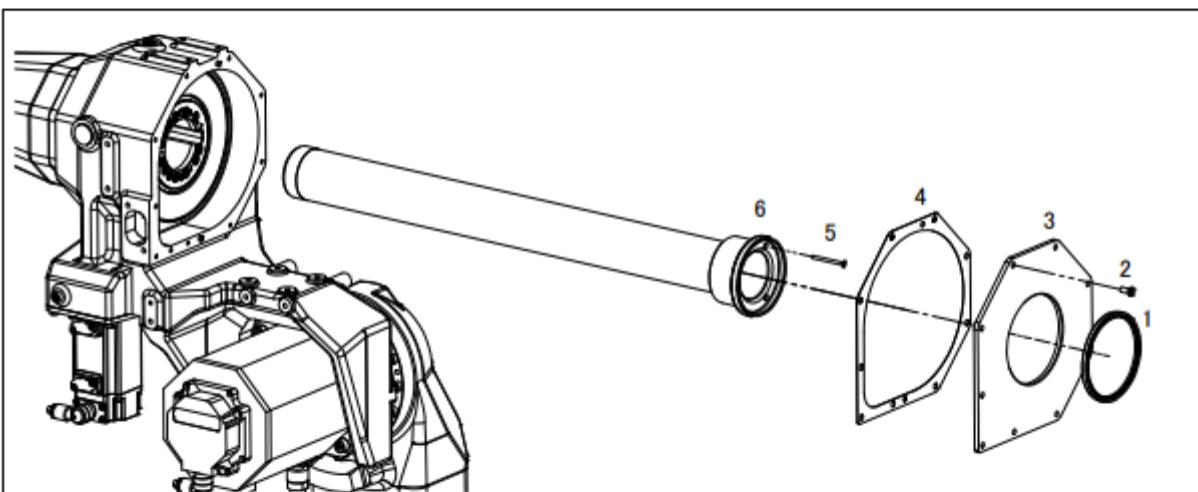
(b) Replacing the J4-axis gearbox (ARC Mate 120iC/10L/12L, M-20iA/10L/12L)
